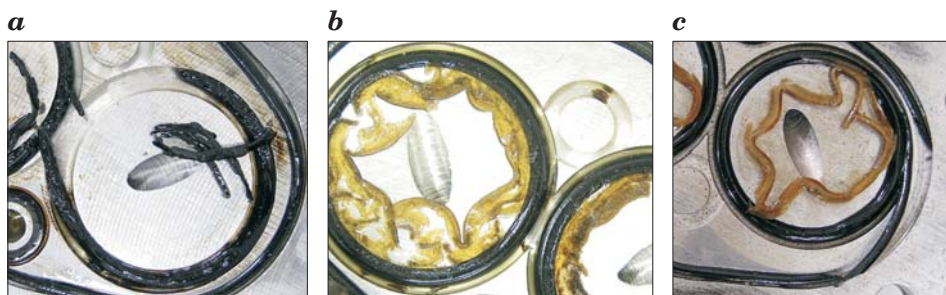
Gear pump seal failures: *a* – torn gear wheel seal off, *b* – fused sealing rings, *c* – torn big seal on the rear end plate (“stadium”)
